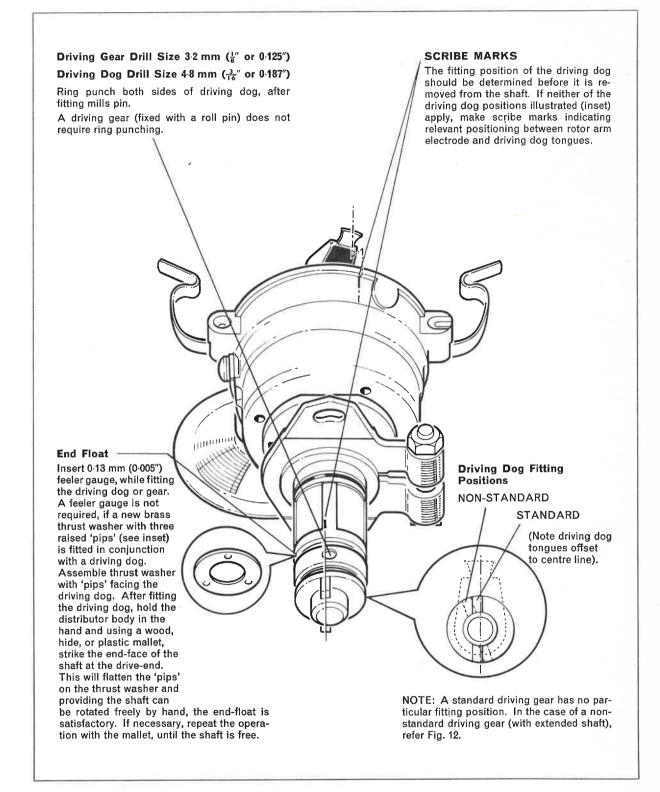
Removing and refitting a driving dog, or gear (refer 'Note')
